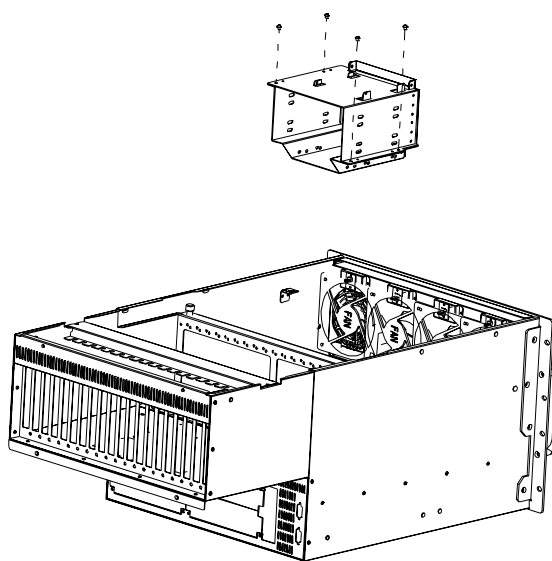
Removing the disk drive bay/ 移除磁盘支架 / 拆除磁碟機支架
